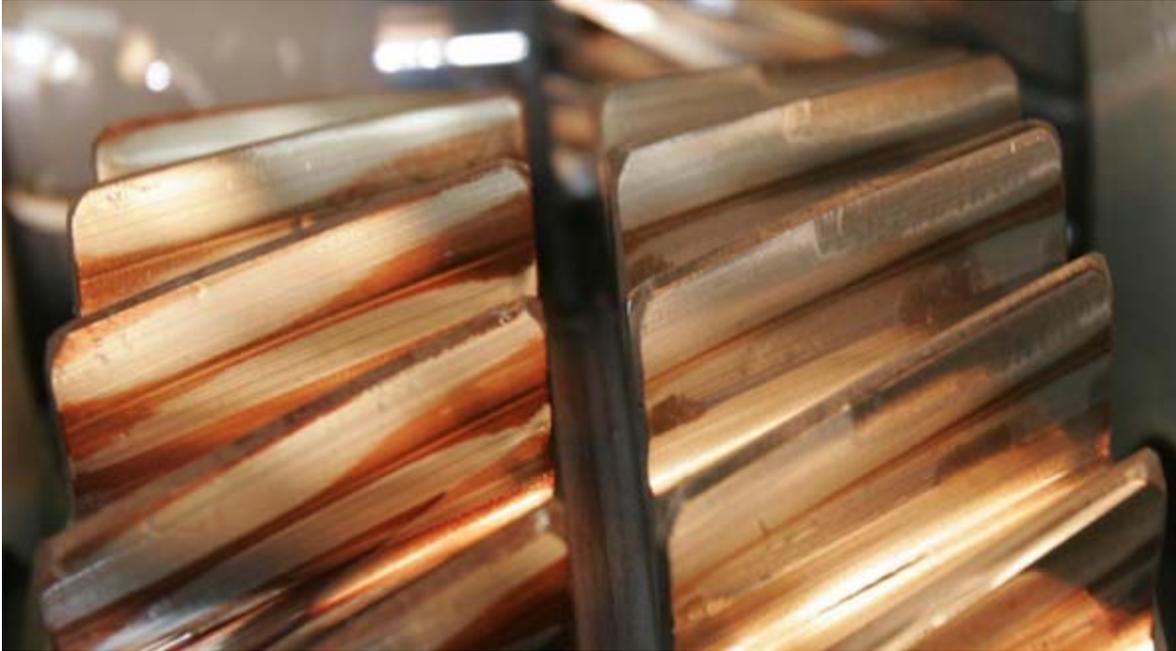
Cutaway of the 3-hole gearbox showing the gear mesh lubricating method
